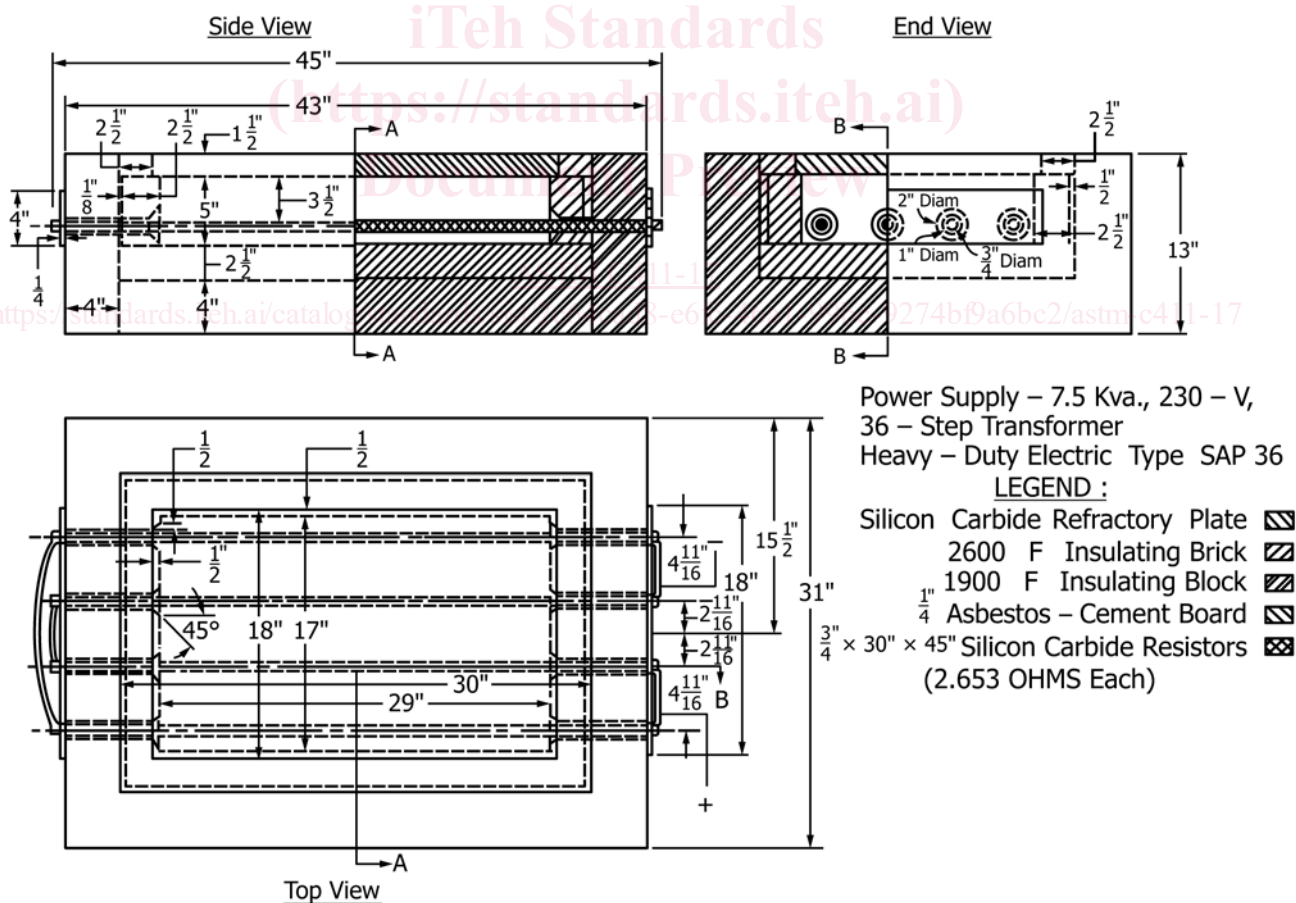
Type A Heating Plate for Hot-Surface Performance Test
